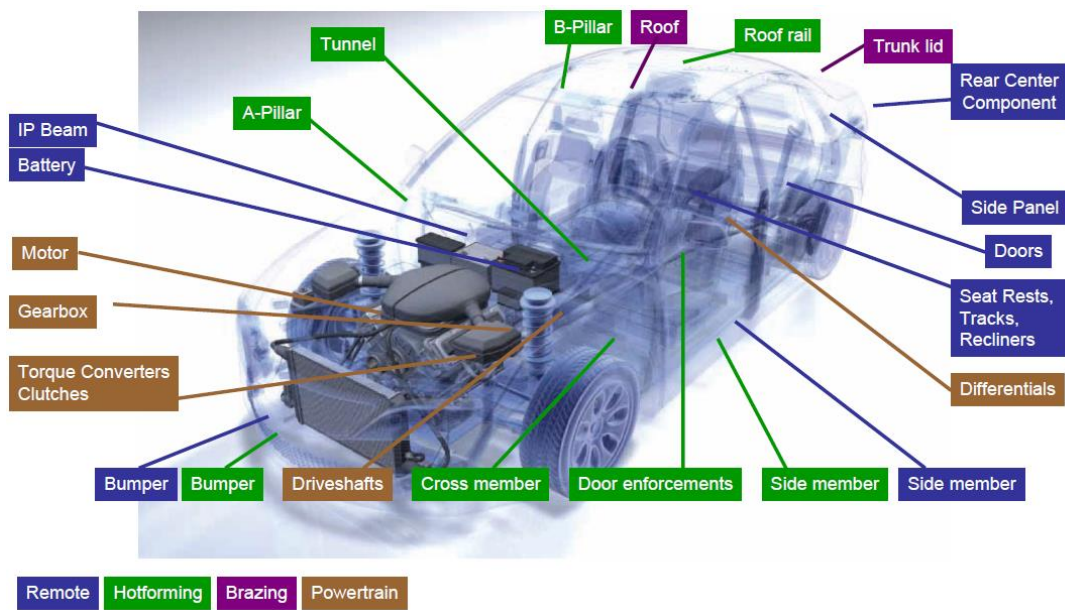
Application of laser welding in the automotive industry [6].
